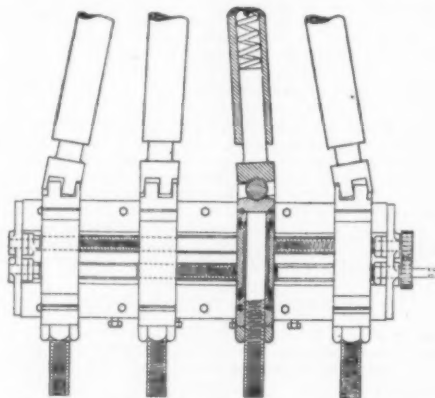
ARRANGEMENT OF THE DRILL SPINDLES.
